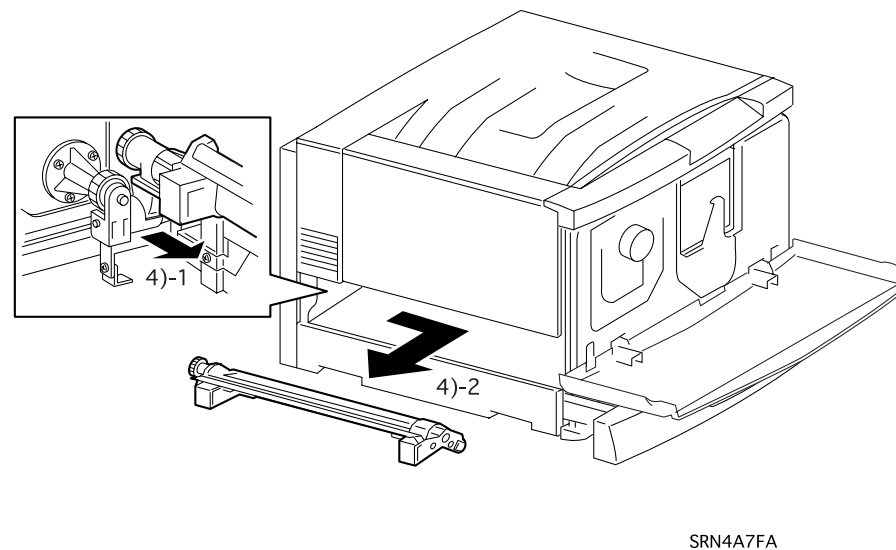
BELT CLEANER ASSEMBLY Removal (2/2)
